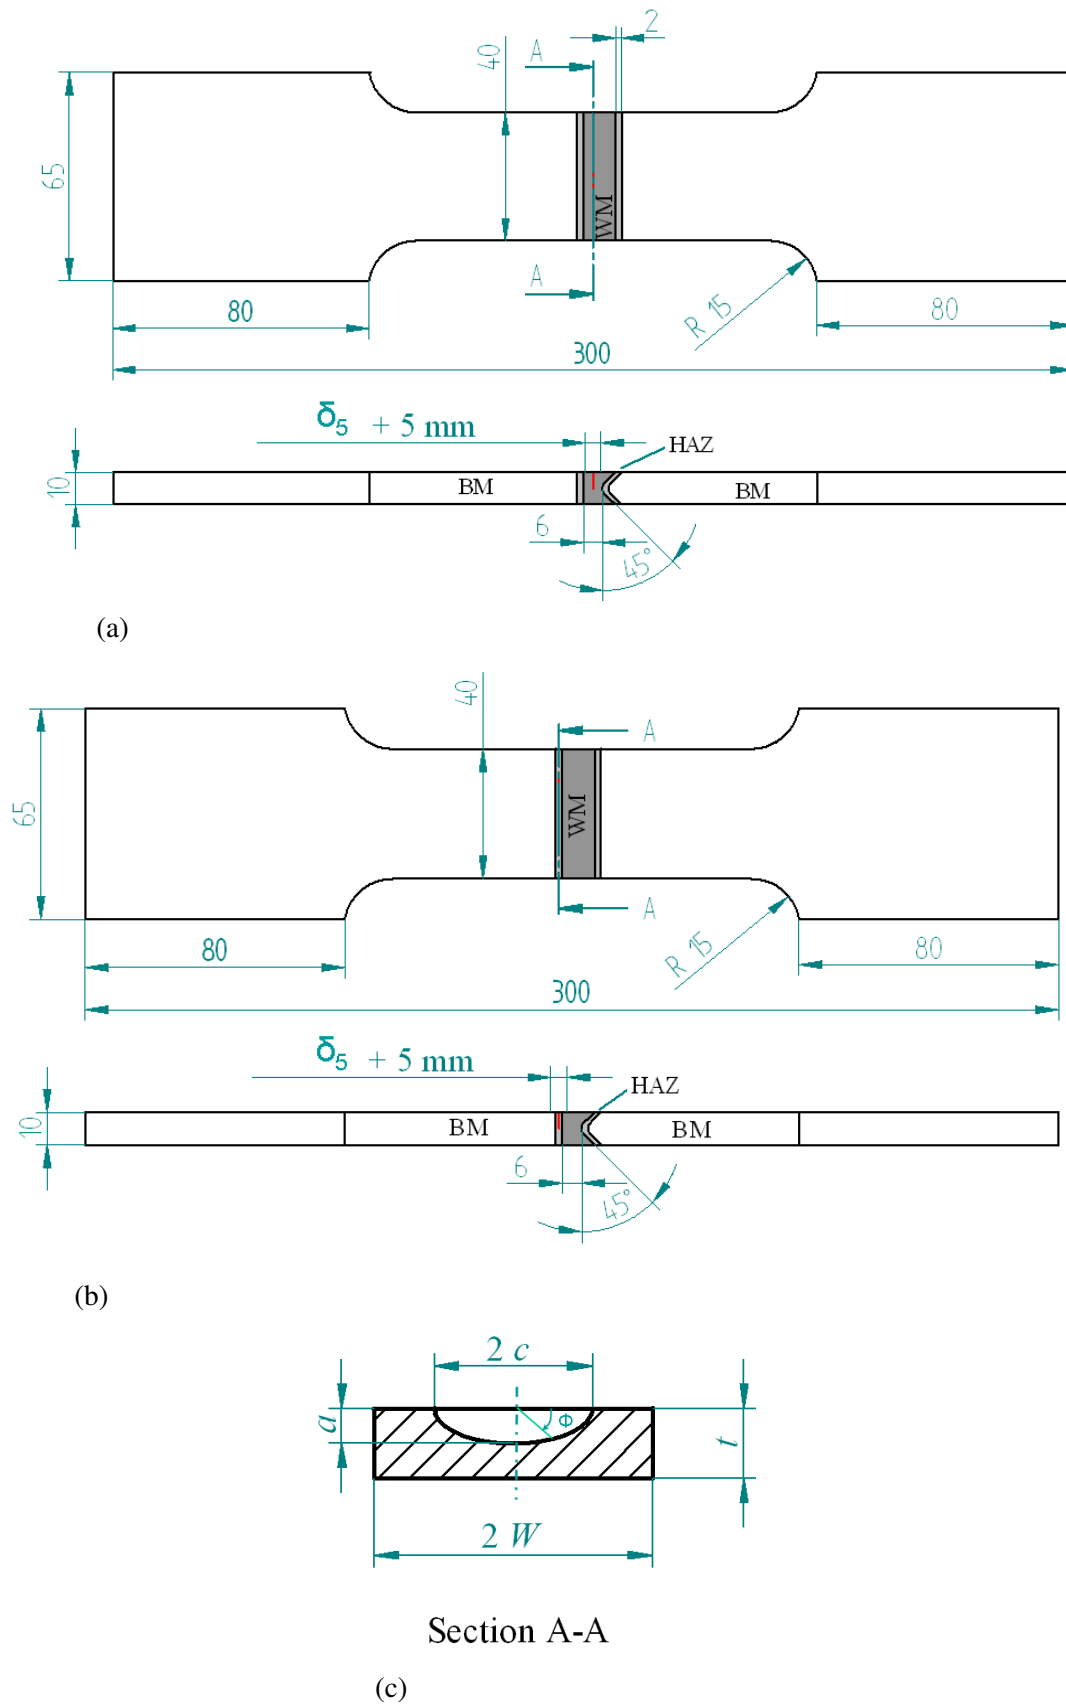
Geometry of welded tensile specimens: (a) tensile panel with semi-elliptical surface crack in WM, (b) tensile panel with semi-elliptical surface crack in HAZ and (c) geometry of semi-elliptical crack.
